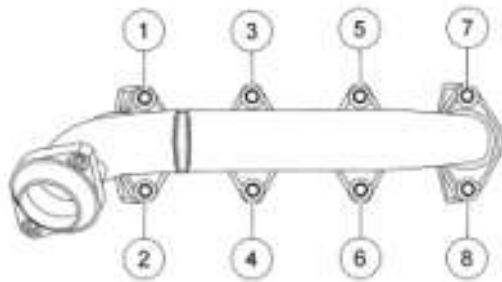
Locating RH Exhaust Manifold-To-Cylinder Head Studs
